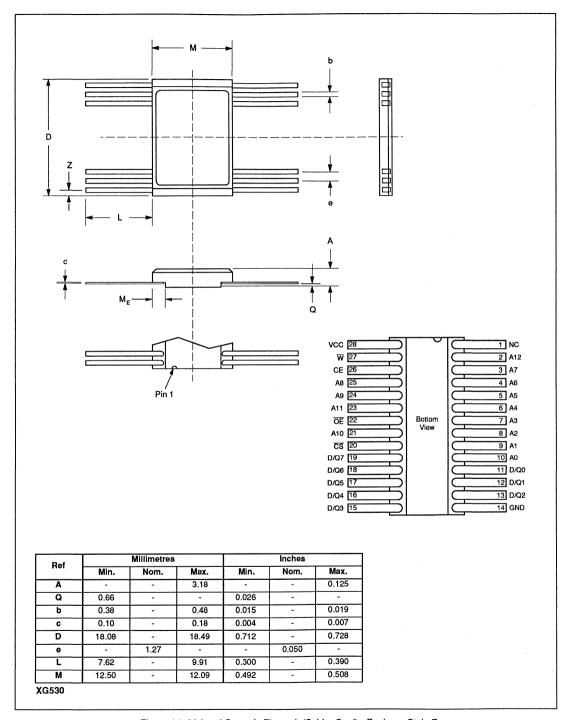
28-Lead Ceramic Flatpack (Solder Seal) - Package Style F
